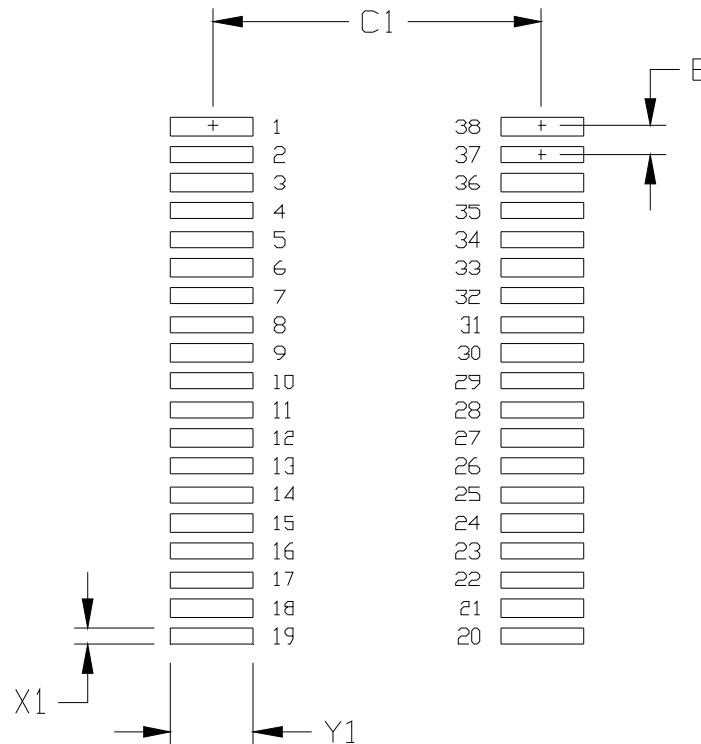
TSSOP-38 PCB Land Pattern Drawing
